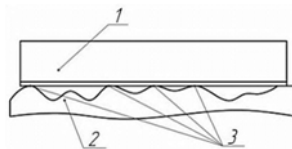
Scheme for checking the surface to be processed when scraping. 1 - ruler; 2 - guide surface; 3 - paint
